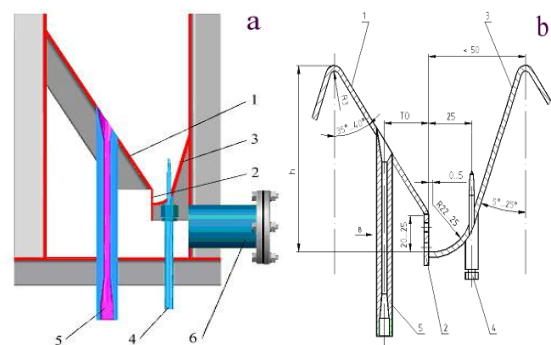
Distributor plate design: a) General sketch. b) Details in the design (all dimensions are in millimeters). Elements : 1- front side; 2- vertical plate; 3- back side; 4- nozzle; 5, 6 - nipples
